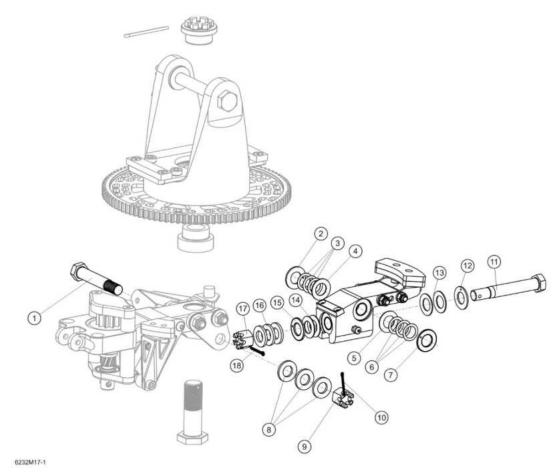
Gimbal Assembly Rotor System III (with spring washers)
